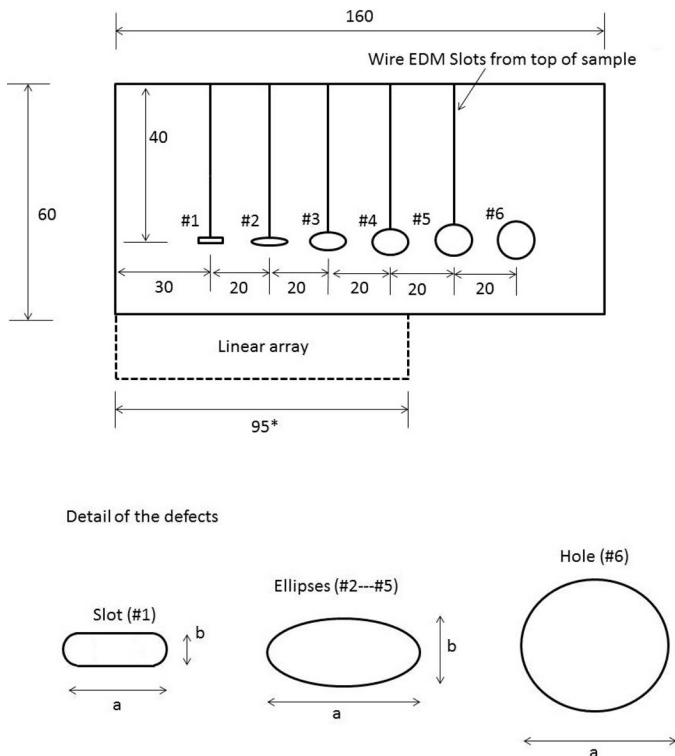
(Dimensions are in millimeters.) Test specimen geometry and array position for the measurement of defects 1 through 3. The array moves to the right-hand edge of the test specimen for the measurement of defects 4 through 6. The size a of defects 1 through 6 is 2.5 mm, and the minor dimension b of the defects is given in Table III. (*This refers to the distance from the center of the first array element to the center of the last array element.)
